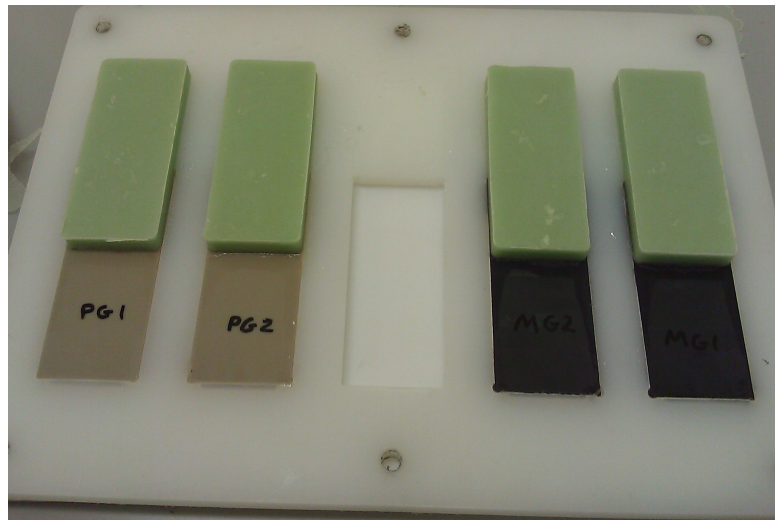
Moulded PEEK-Cement samples upon removal from the cementing mould
